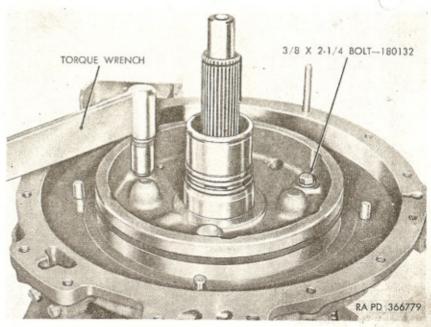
Tightening bolts attaching output shaft bearing retainer to transmission case (303M).
